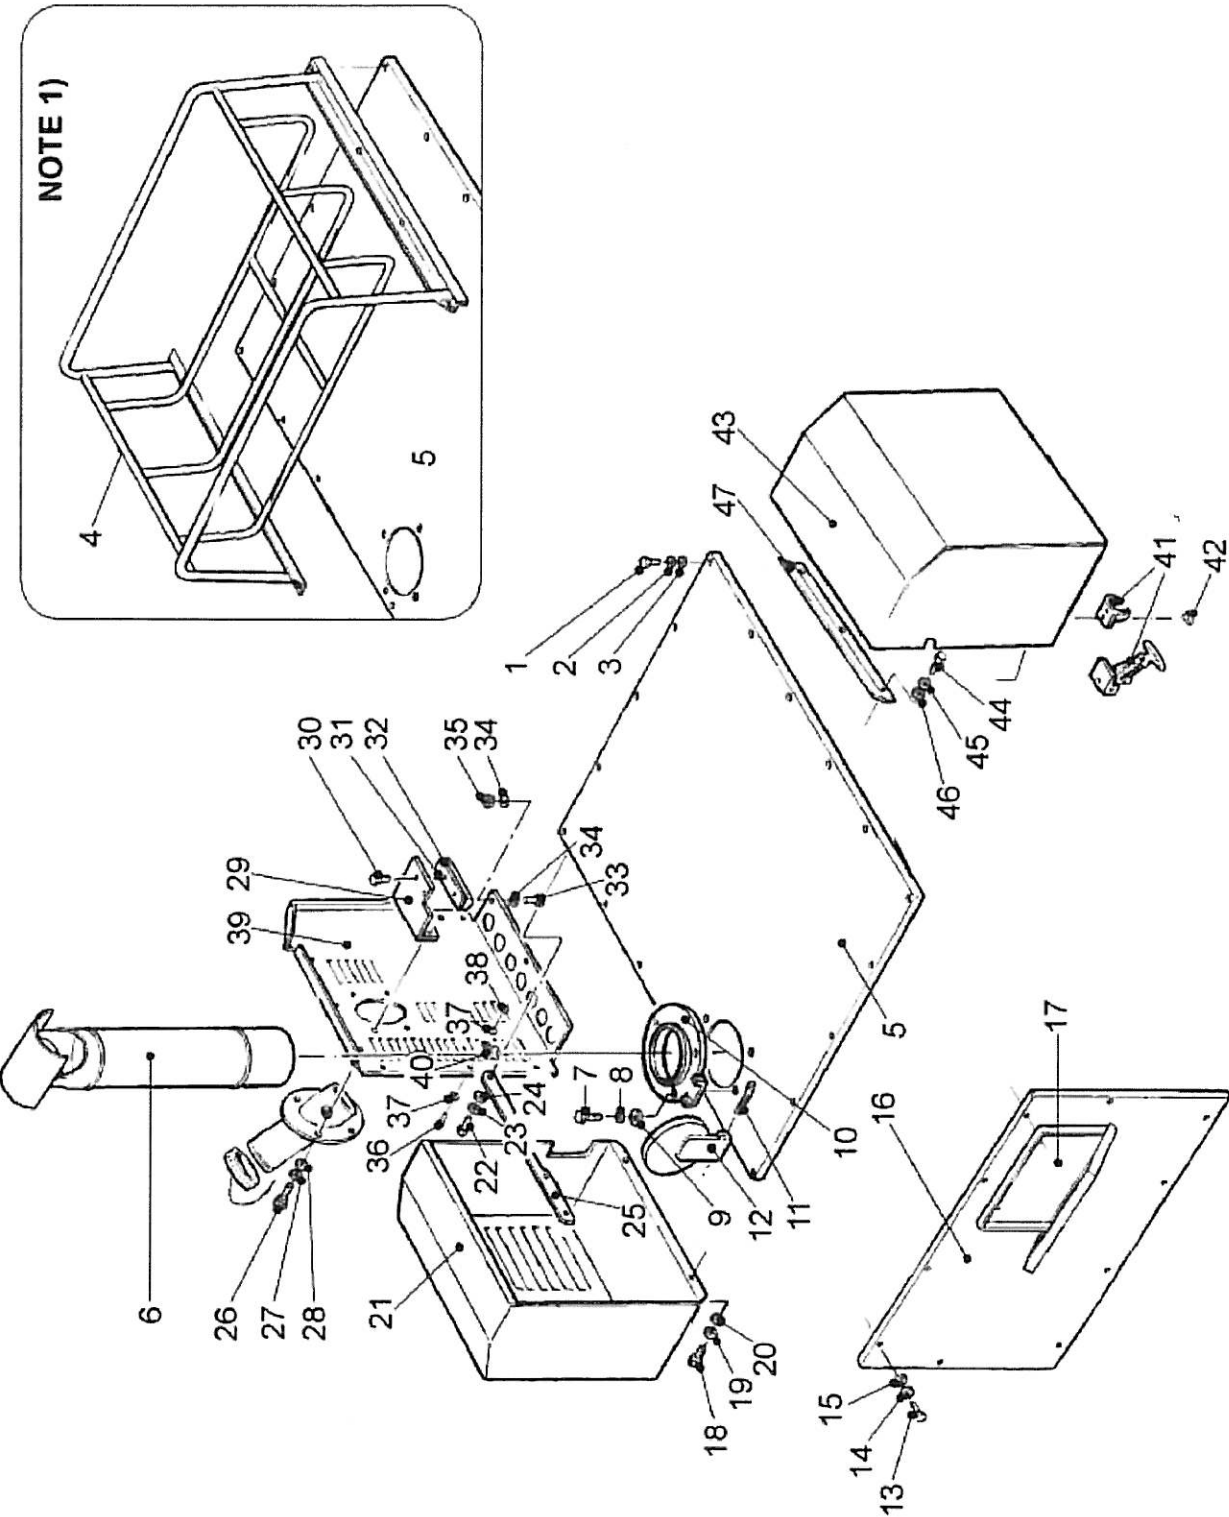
PANELS/COVERS (SHEET 1 OF 2)
